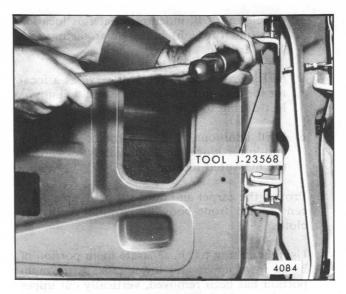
Door Hinge Pin Removal - "H" Styles
